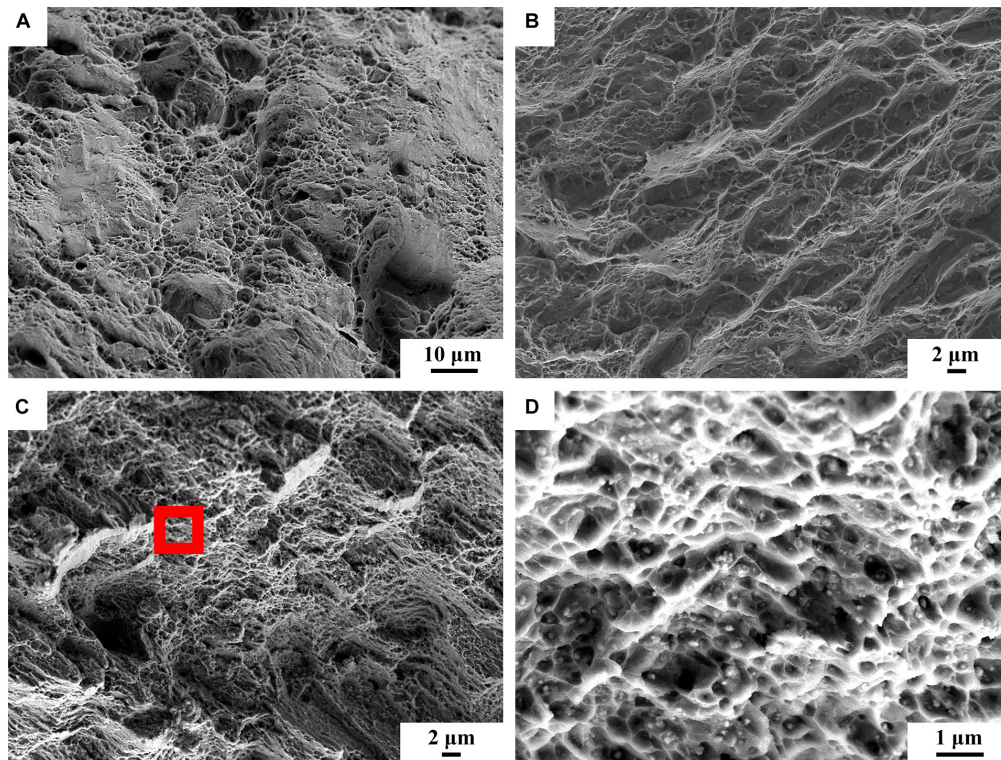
| The fracture surfaces of tensile samples: (A) BM, (B) FSP, (C) FSP-ZrO₂, (D) the enlarged view of red rectangle of (c).
